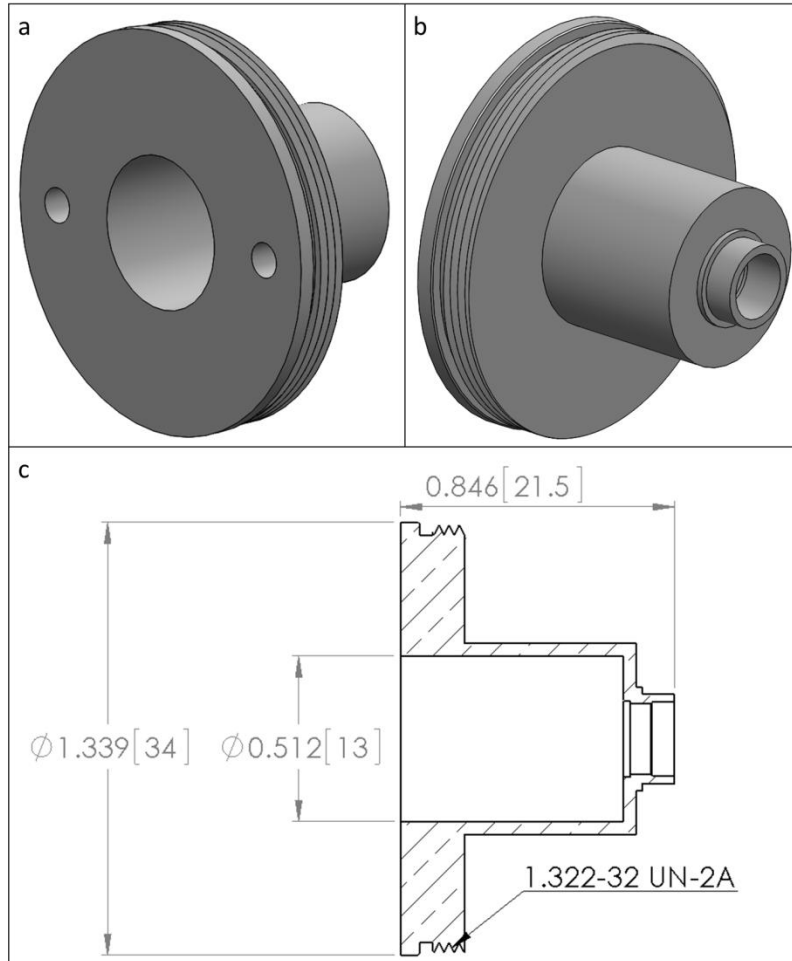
Two views of the sin motor mount (a, b). The spin motor bearing fits onto the small cylindrical surface shown in (a) and the motor is housed inside the larger cylindrical opening shown in (b). The spin motor mount screws into one end of the spin enclosure. Figure (c) shows a cross section view of the motor mount. Dimensions are in inches [millimeters].
